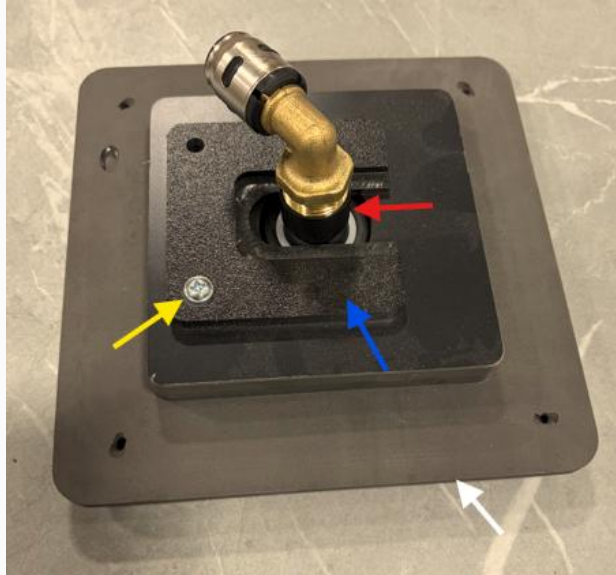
Service panel with shower head installed — service panel, pivot fitting, keeper, and mounting screw locations.
